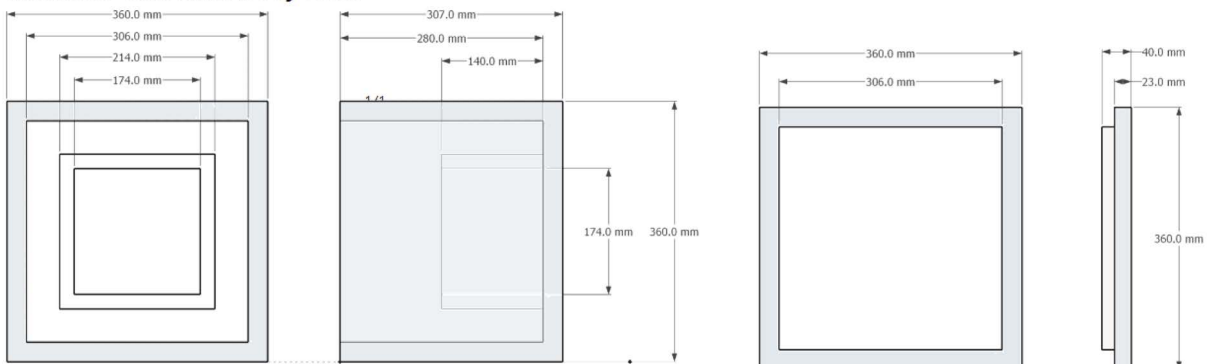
Design drawing of ¹³¹I mIBG cryogenic transport container.
